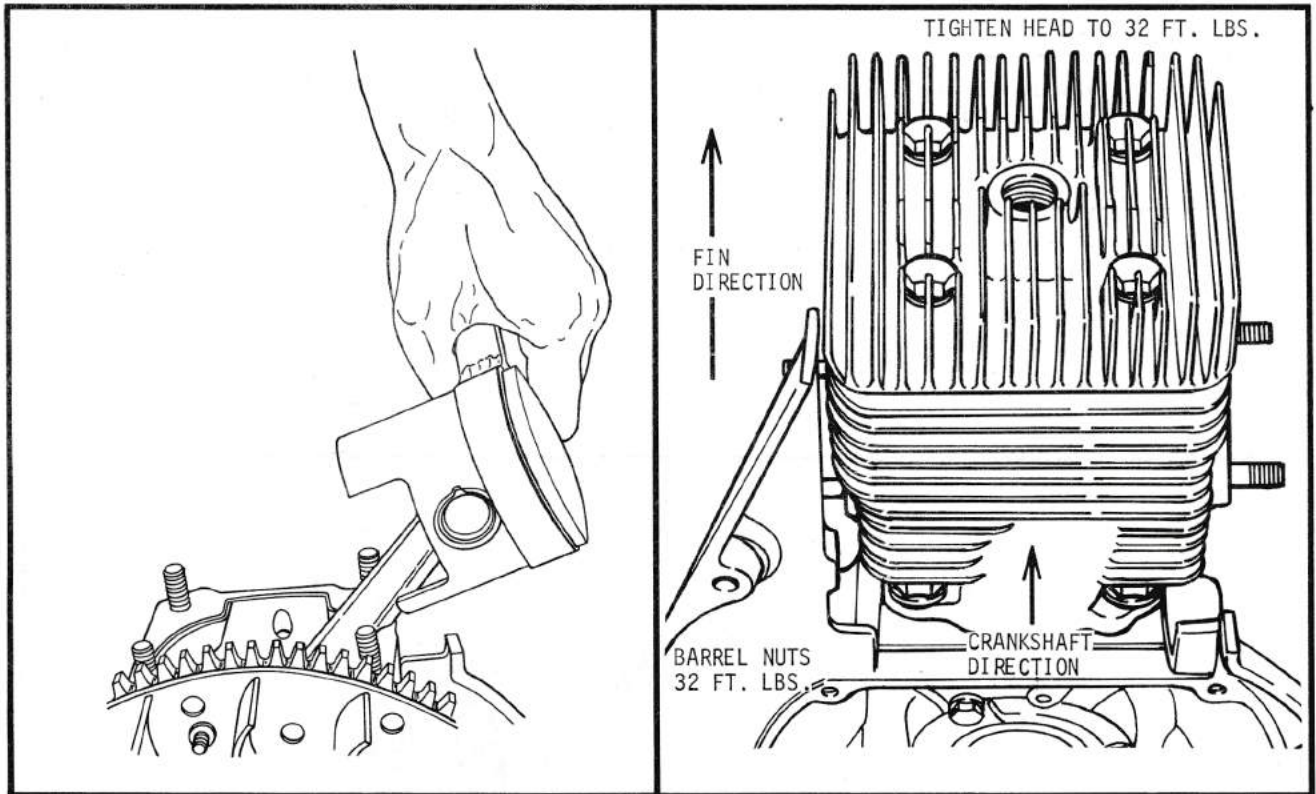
INSTALL BARREL OVER PISTON
